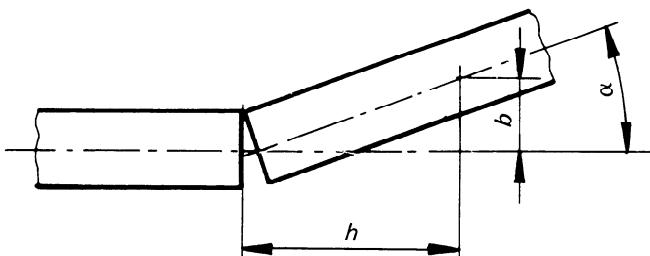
Contact fault in butt welding as a result of deformation of machine
